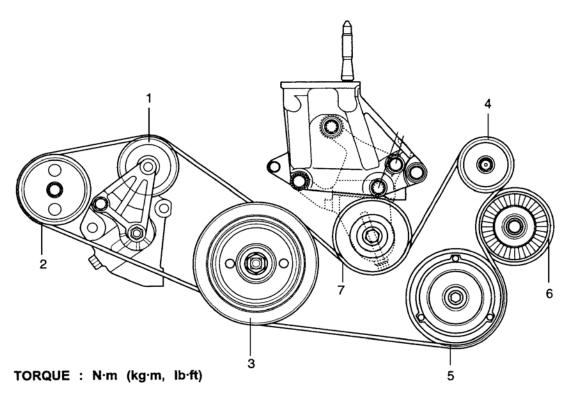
Air Conditioning Compressor & Alternator Belt Routing Courtesy of KIA MOTORS AMERICA, INC.
